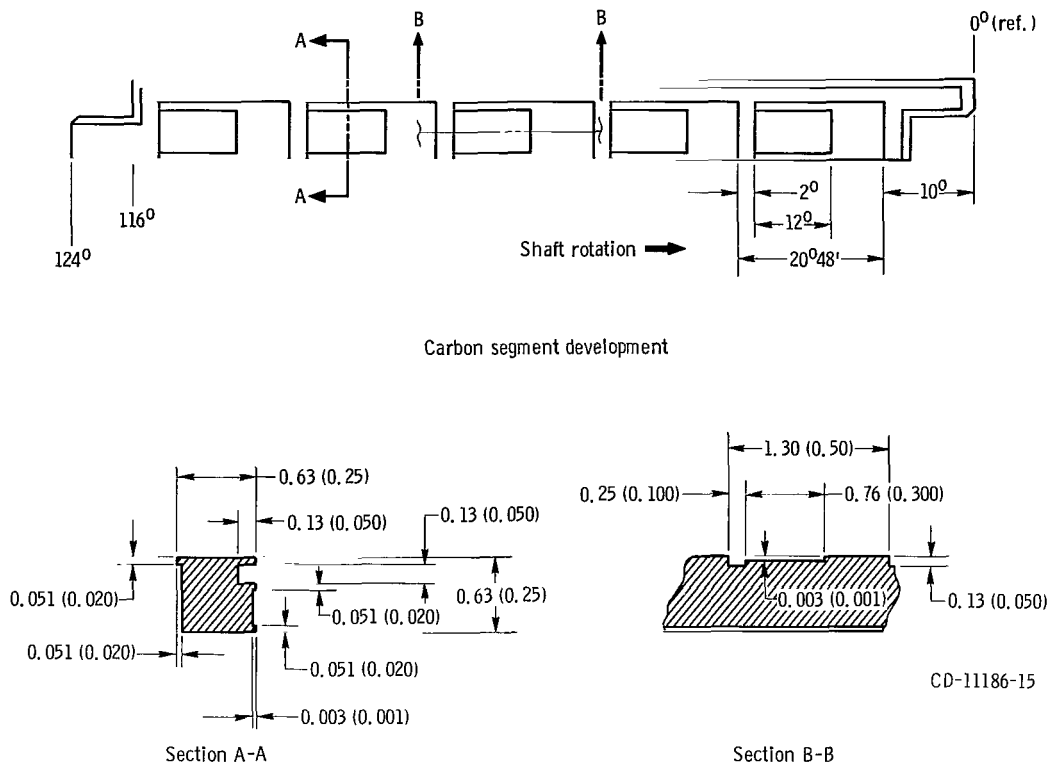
Details of self-acting lift geometry machined into bore of carbon segments. Dimensions in centimeters (in.).
